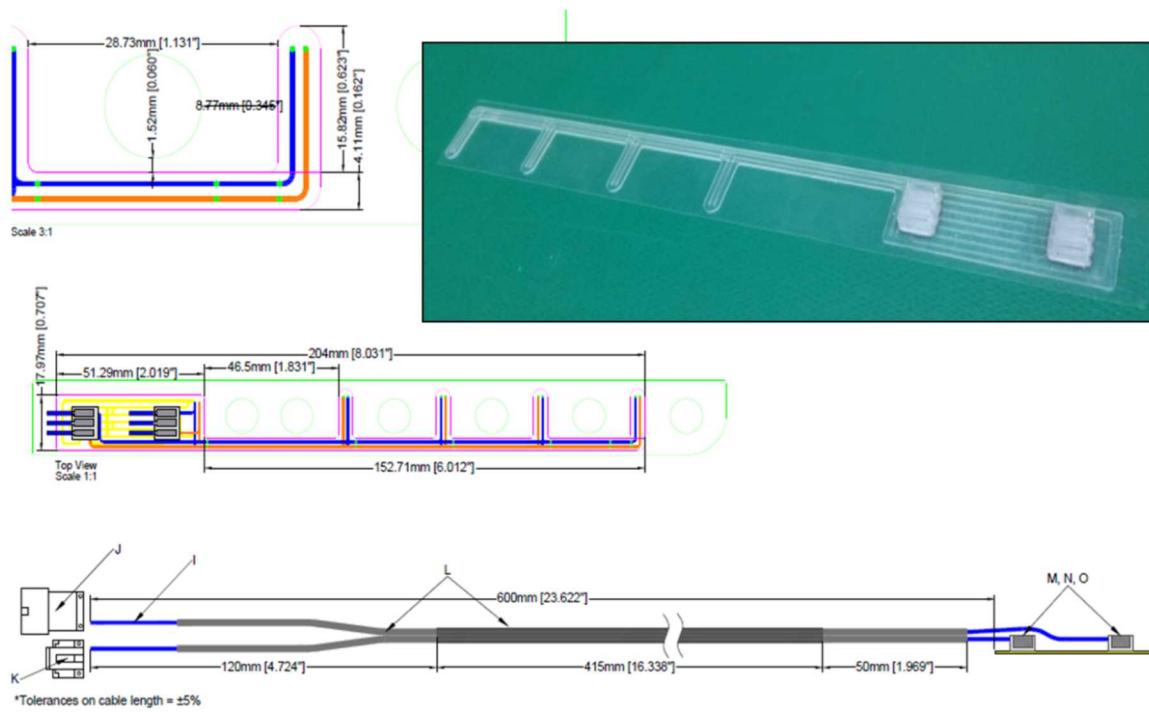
Custom CVM Sensor for Wing Box Fitting Application
